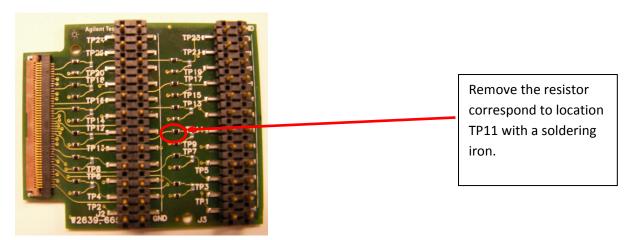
Location of the 37 .4ohm resistor for TP11 on the W2639A scope probe board adapter.
